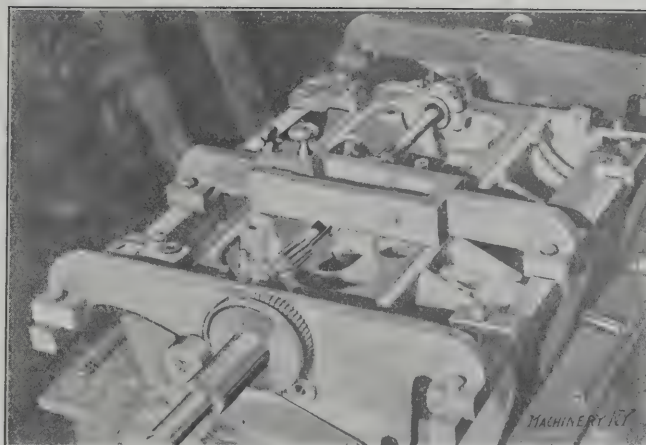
Reaming Jig for Hand Reaming Crank-shaft Bearings after the Boring Operation
